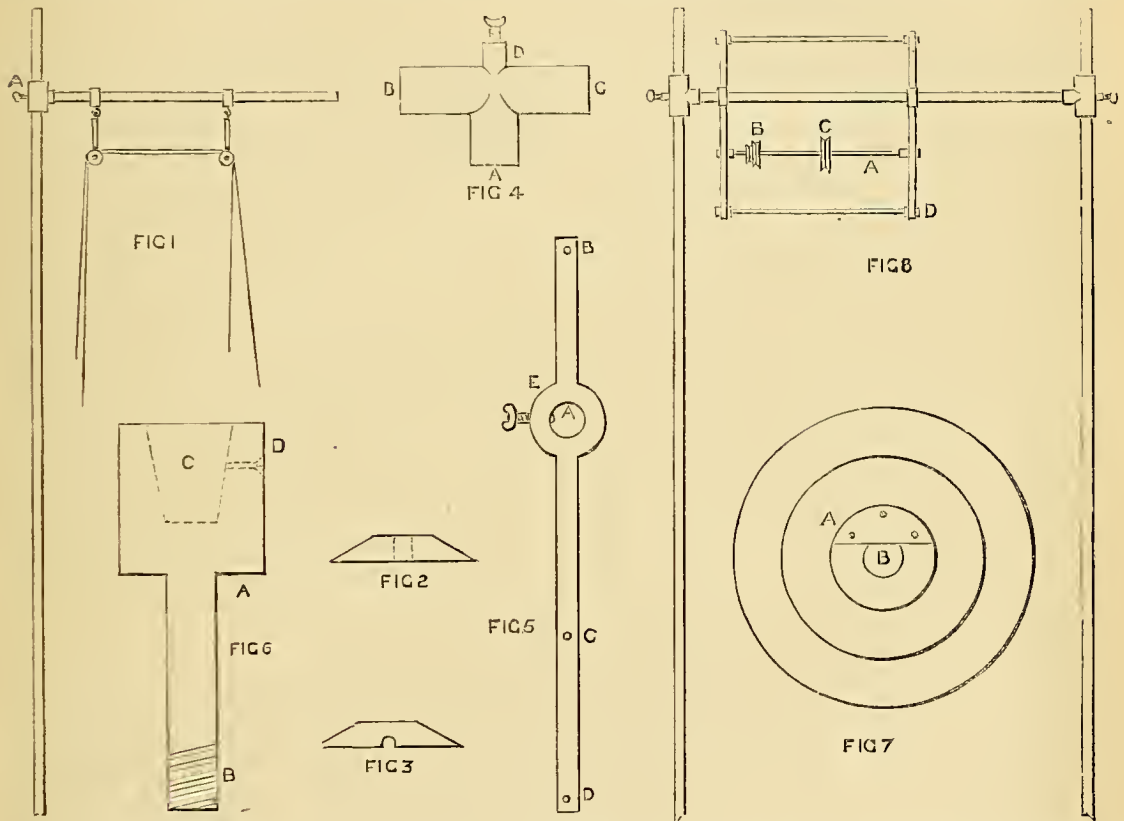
OVERHEAD WHEN FRAME IS NOT SUPPORTED AT EACH END. FIG. 2.—WOODEN SOCKET FOR IRON BARS. FIG. 3.—CLAMP TO FIX BAR TO BED OF LATHE, ETC. FIG. 4.—CROSS PIECE OF GAS TUBING TO SLIDE ON BAR. FIG. 5.—WOOD MODEL FOR SIDE BARS OF FRAME. FIG. 6.—BEARING FOR SPINDLE—FULL SIZE. FIG. 7.—BRASS PLATE ON EITHER SIDE OF PULLEY. FIG. 8.—OVERHEAD MOTION, COMPLETE.
